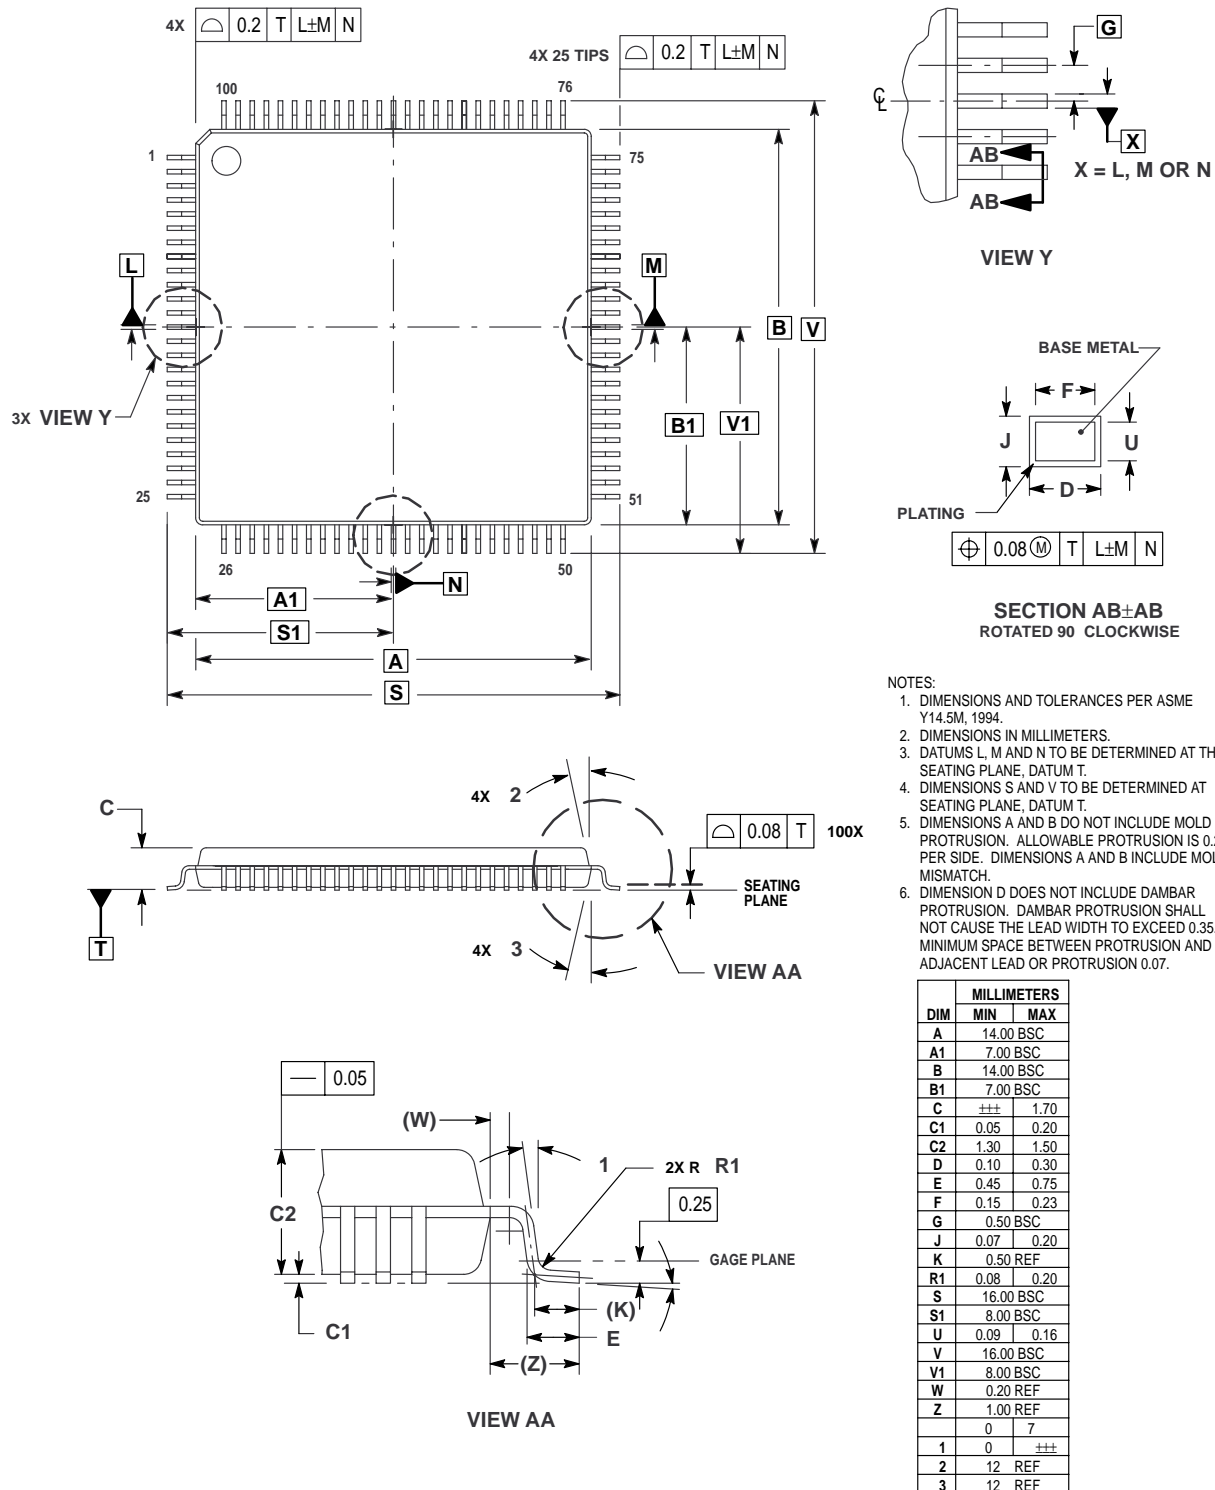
100-Pin TQFP Mechanical Dimensions
